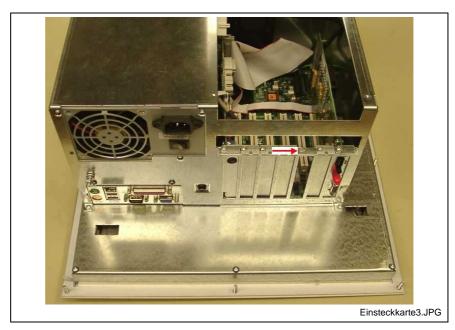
Installing the plug-in card: Remove the slot plate
